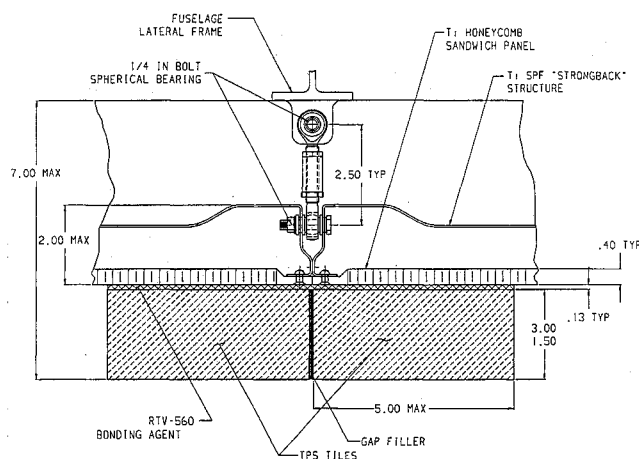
Heatshield TPS bondline design and mechanical attachment concept.
